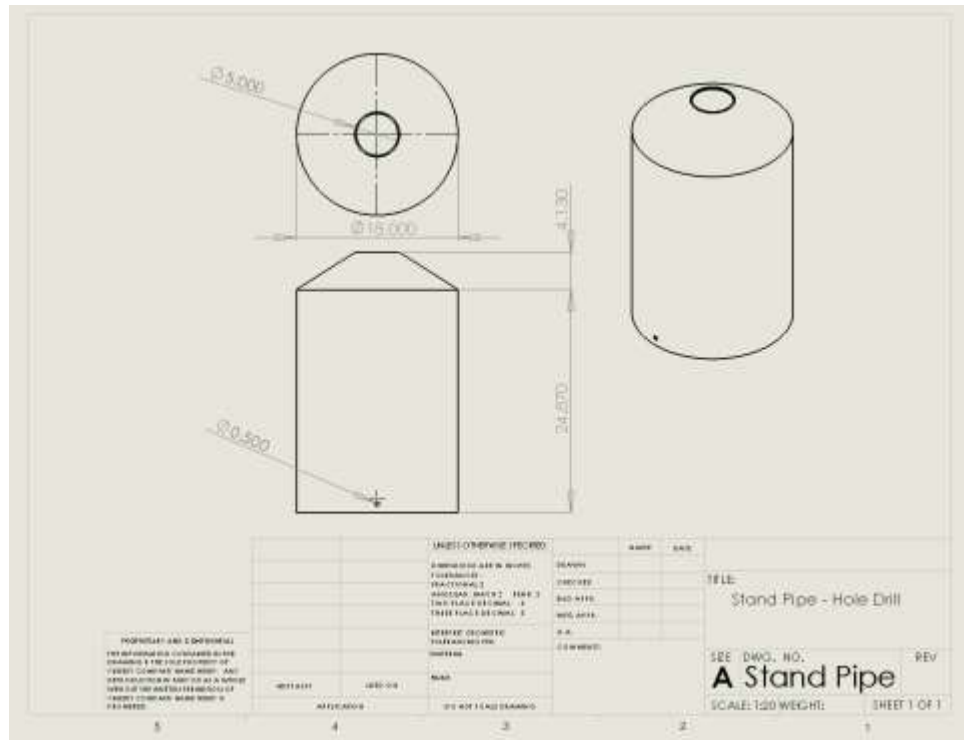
Stand Pipe Engineering Drawing (all of the dimensions are manufacture in +/- 0.05 tolerances -not shown in the drawing-)
